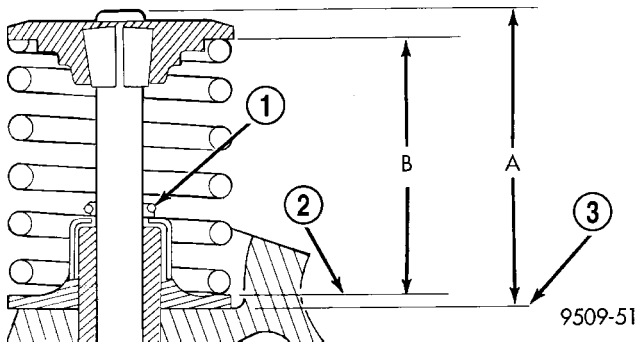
Checking Spring Installed Height and Valve Tip Height Dimensions
